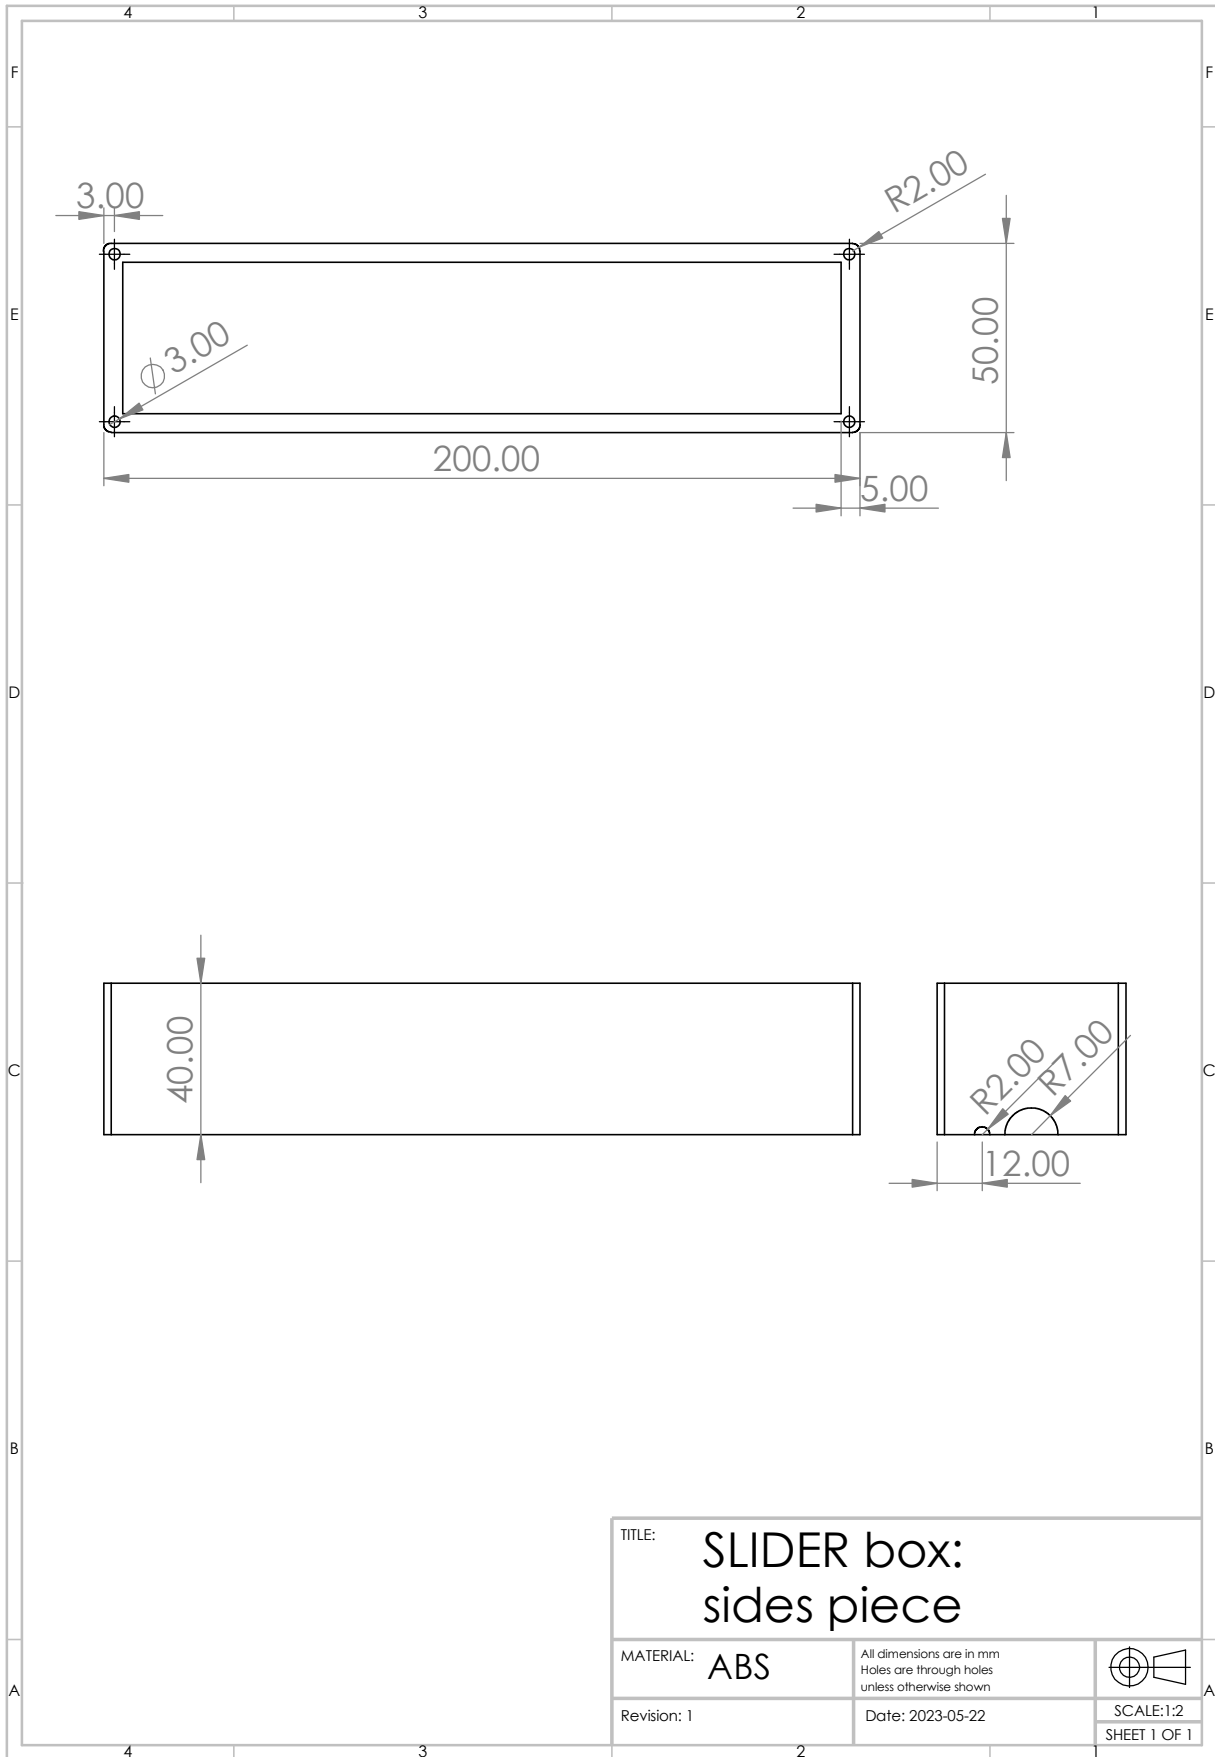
Technical drawing of the sides piece of the SLIDER box.
